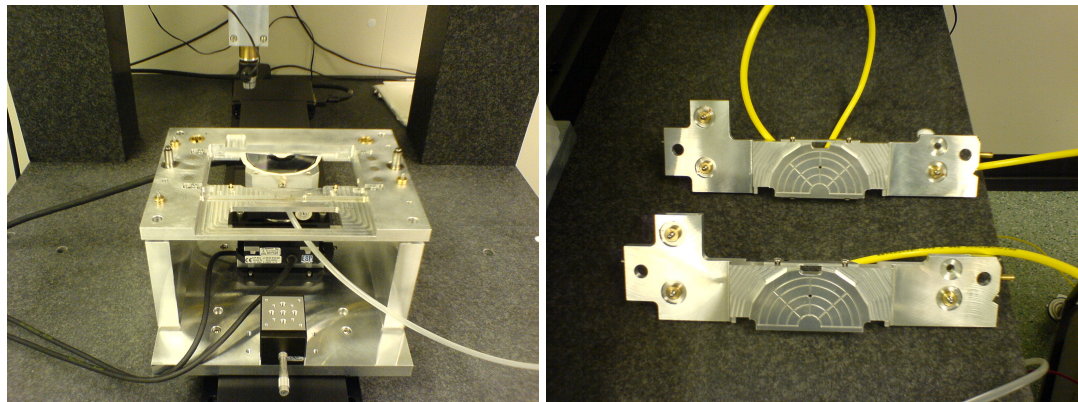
The alignment station with turn-plate to the left. A manual z-stage is mounted on the alignment station base plate. The pedestal jig is to be mounted on this z-stage for the hybrid on pedestal assembly. The two gluing jigs are shown to the right.
